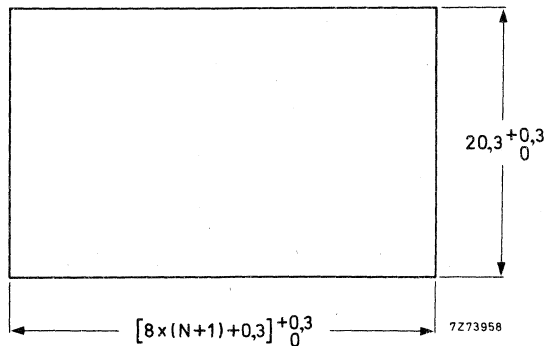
Panel cut-out for switches and end-pieces with brackets.
